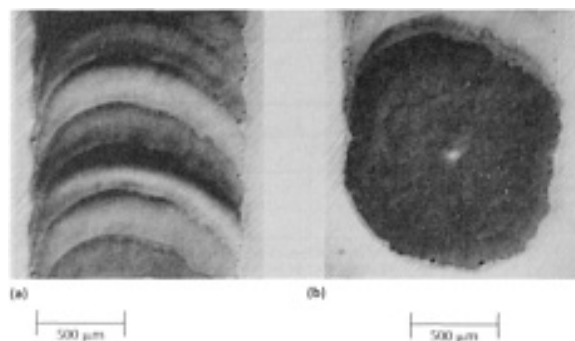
SEM SURFACE IMAGE OF PULSED ND:YAG LASER WELDS IN LOW-BORON CONTENT ALLOY 214. (A) SOLIDIFICATION CRACKING. (B) CRATER CRACKING
